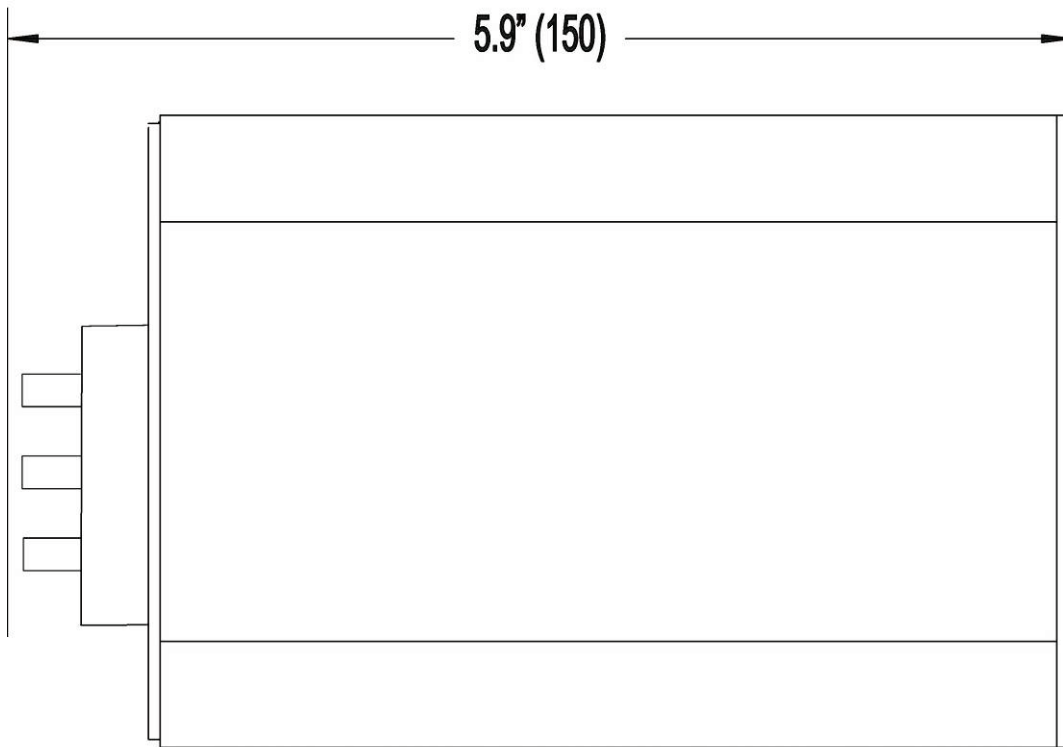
Mounting and Overall Dimensions (M571 20A version)
